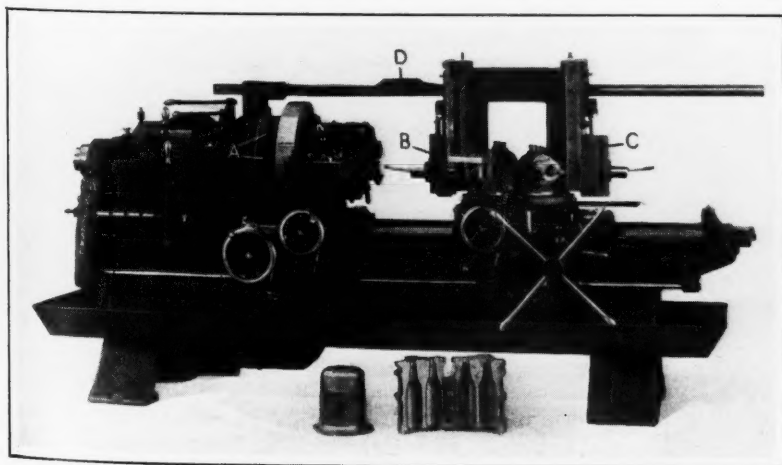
Cincinnati-Acme Turret Lathe Arranged for Machining Bottle Blanks and Molds on a Quantity Production Basis
